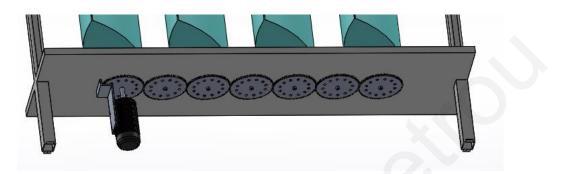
Gear connection for parallel drive, motor for fins drive and base connections
